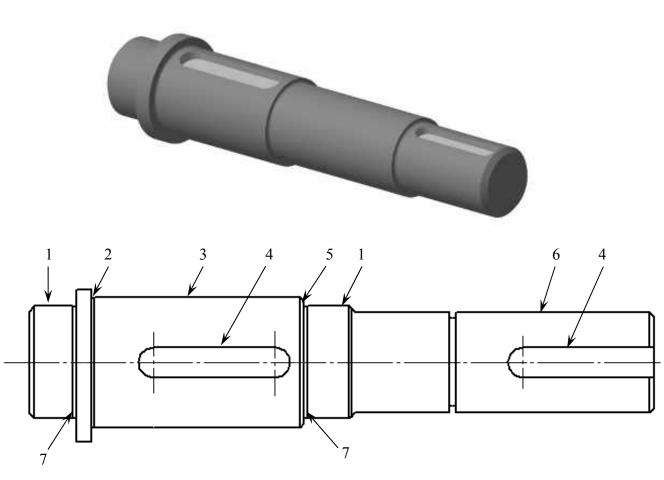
An output shaft design: 1 – neck for bearings; 2 – thrust filet for a gear; 3 – neck for a gear; 4 – keyseats; 5 – thrust filet for a bearing; 6 – neck for half-coupling; 7 – grooves
